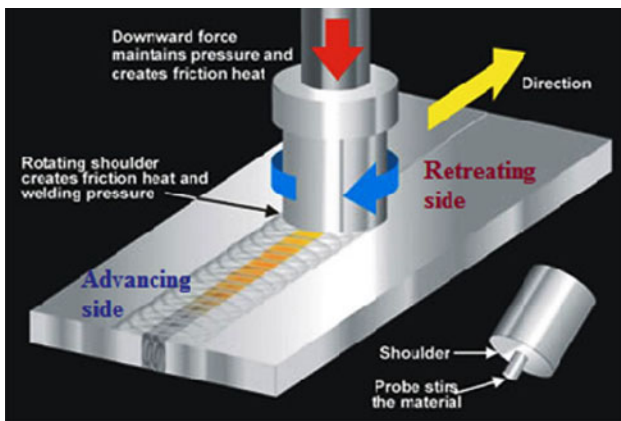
Schematic drawing of the friction stir welding process (Ref 3)
